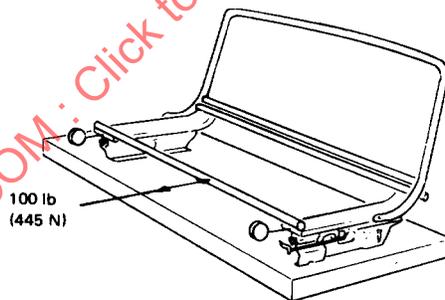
STATIC FORE AND AFT CHUCKING TEST OF SEAT ADJUSTER
